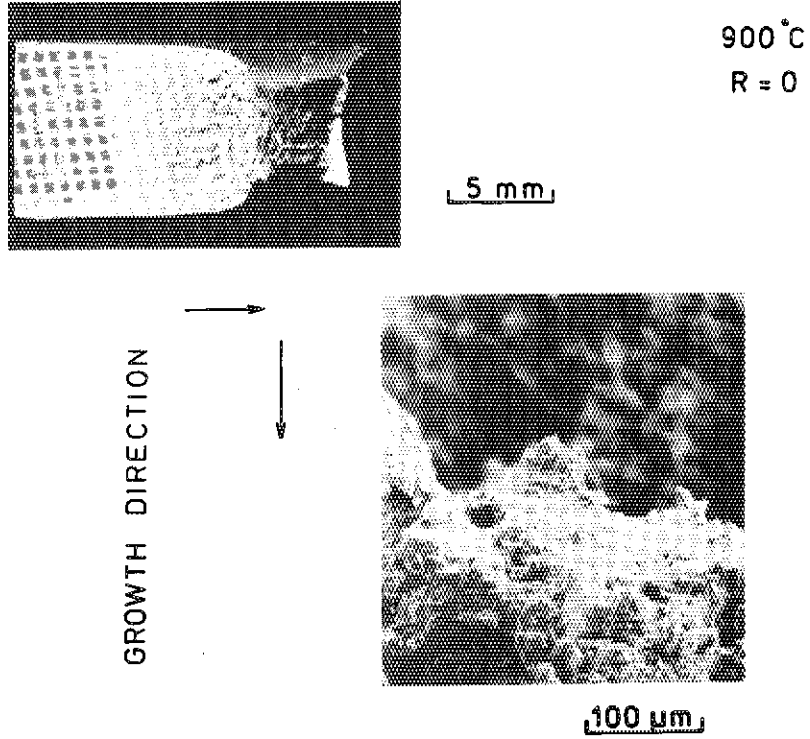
Appearances of fractured surface (S.E.N., 900°C, R=0)
